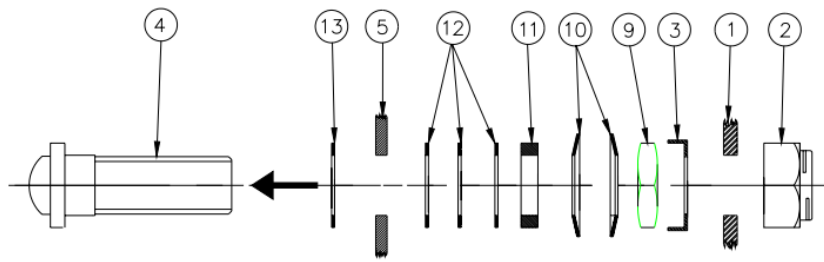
ASSEMBLY SEQUENCE OF CROSS-OVER VALVE STEM COMPONENTS
